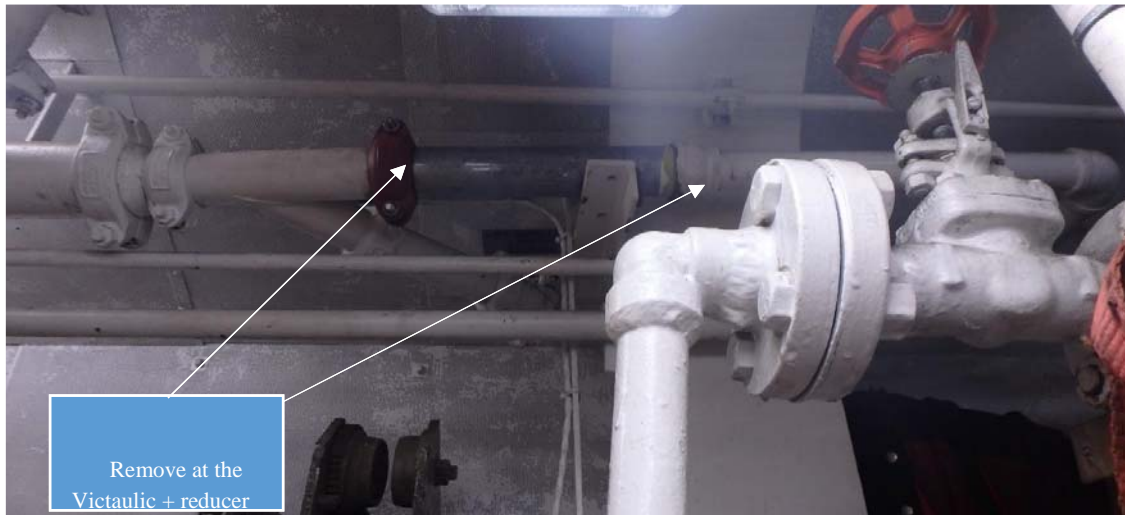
at frame 81, gray water piping to be removed/reinstall
